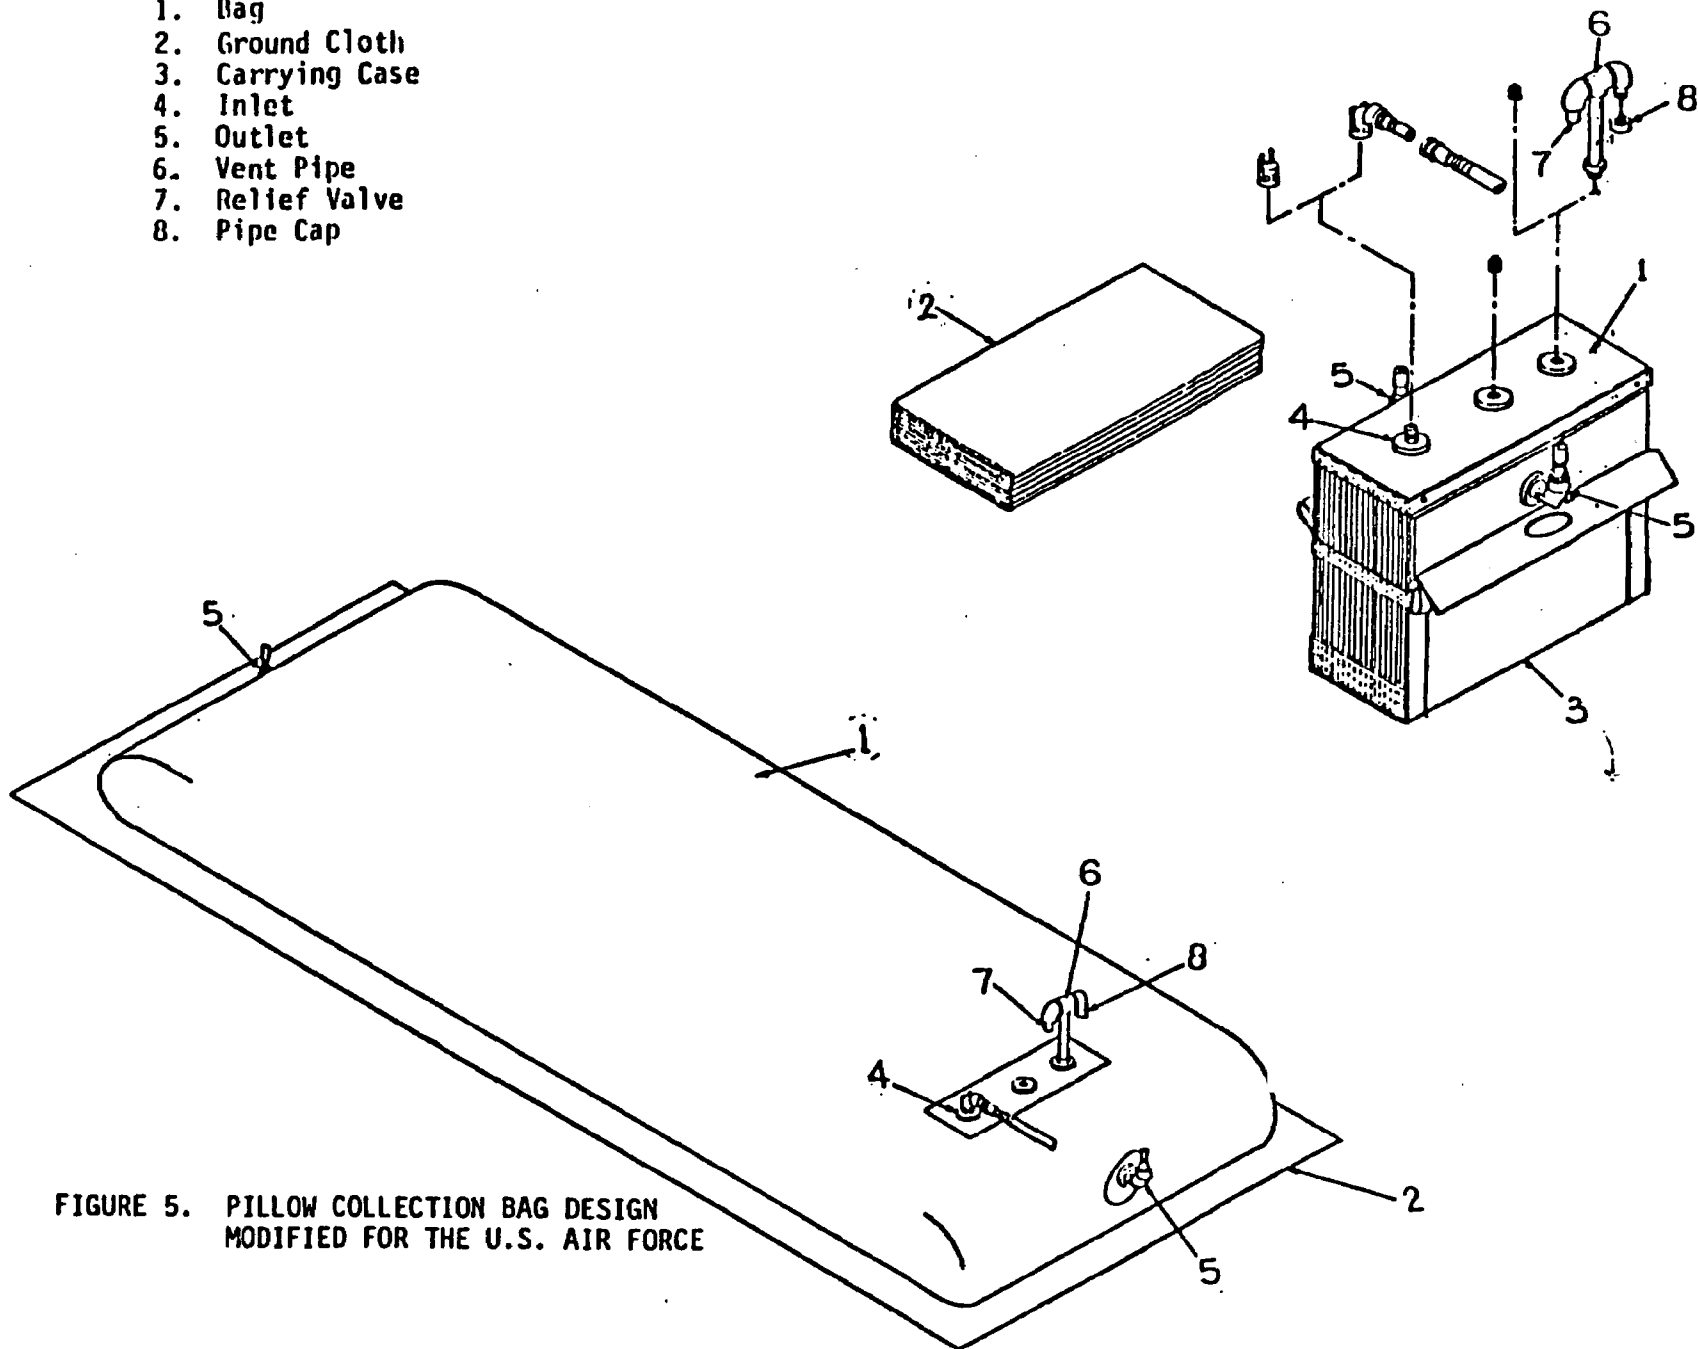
PILLOW COLLECTION BAG DESIGN
